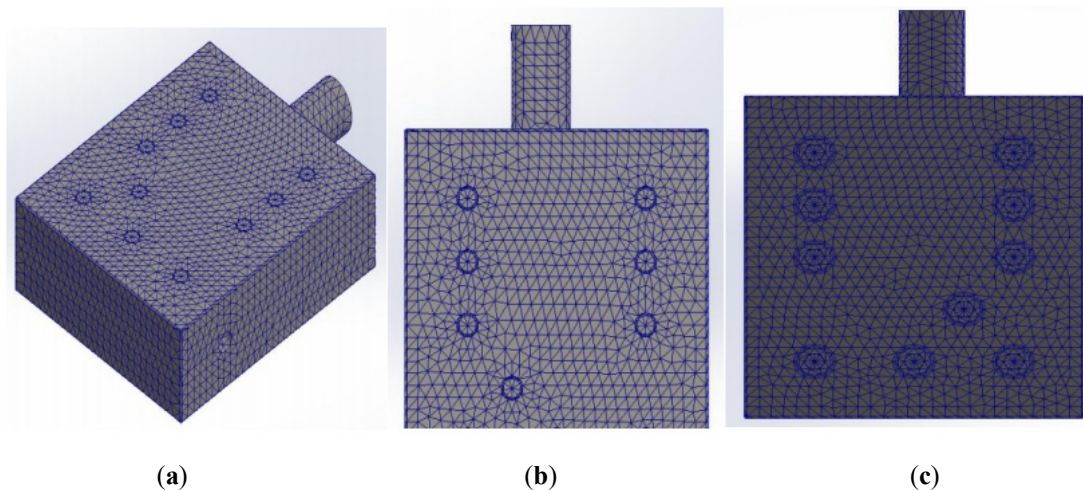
Meshed parts of the die with a different view. (a) Meshed part view one, (b) Meshed part view two, (c) Meshed part view three.
